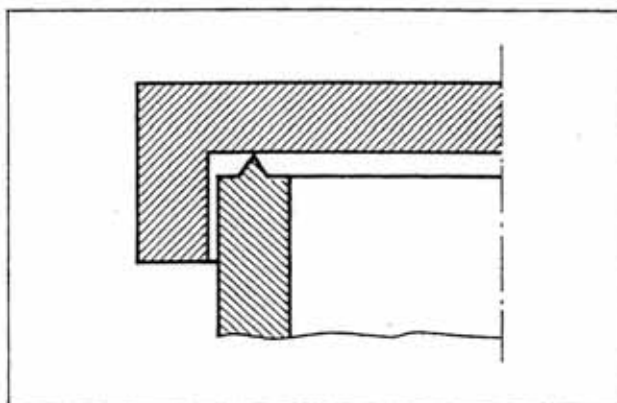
Upper part with outer centring. Welding seam covered outwards; molten material can flow inwards.
